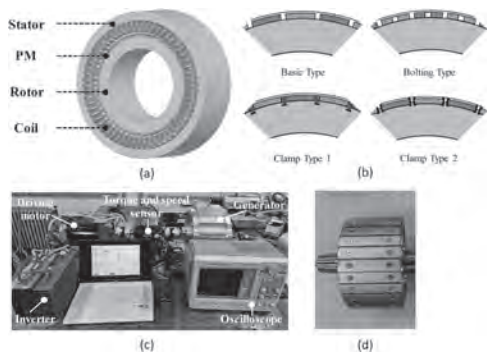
Basic Model, Magnet mounting method and Manufactured Model: (a) Basic Model, (b) Magnet mounting method, (c) Manufactured Model, (d) Rotor with bolting.
